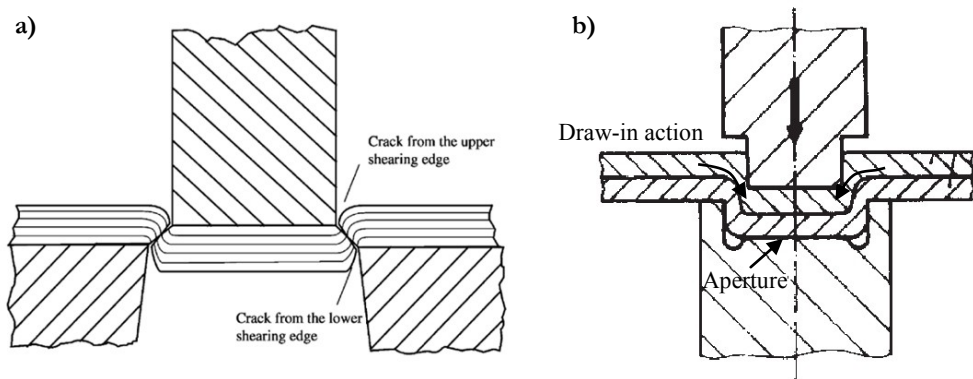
a) Principle of sheet metal cutting by shearing process showing the mechanisms of crack propagation [50] b) Schematic showing draw-in action founded in typical mechanical clinching and sheet metal cutting [51].
